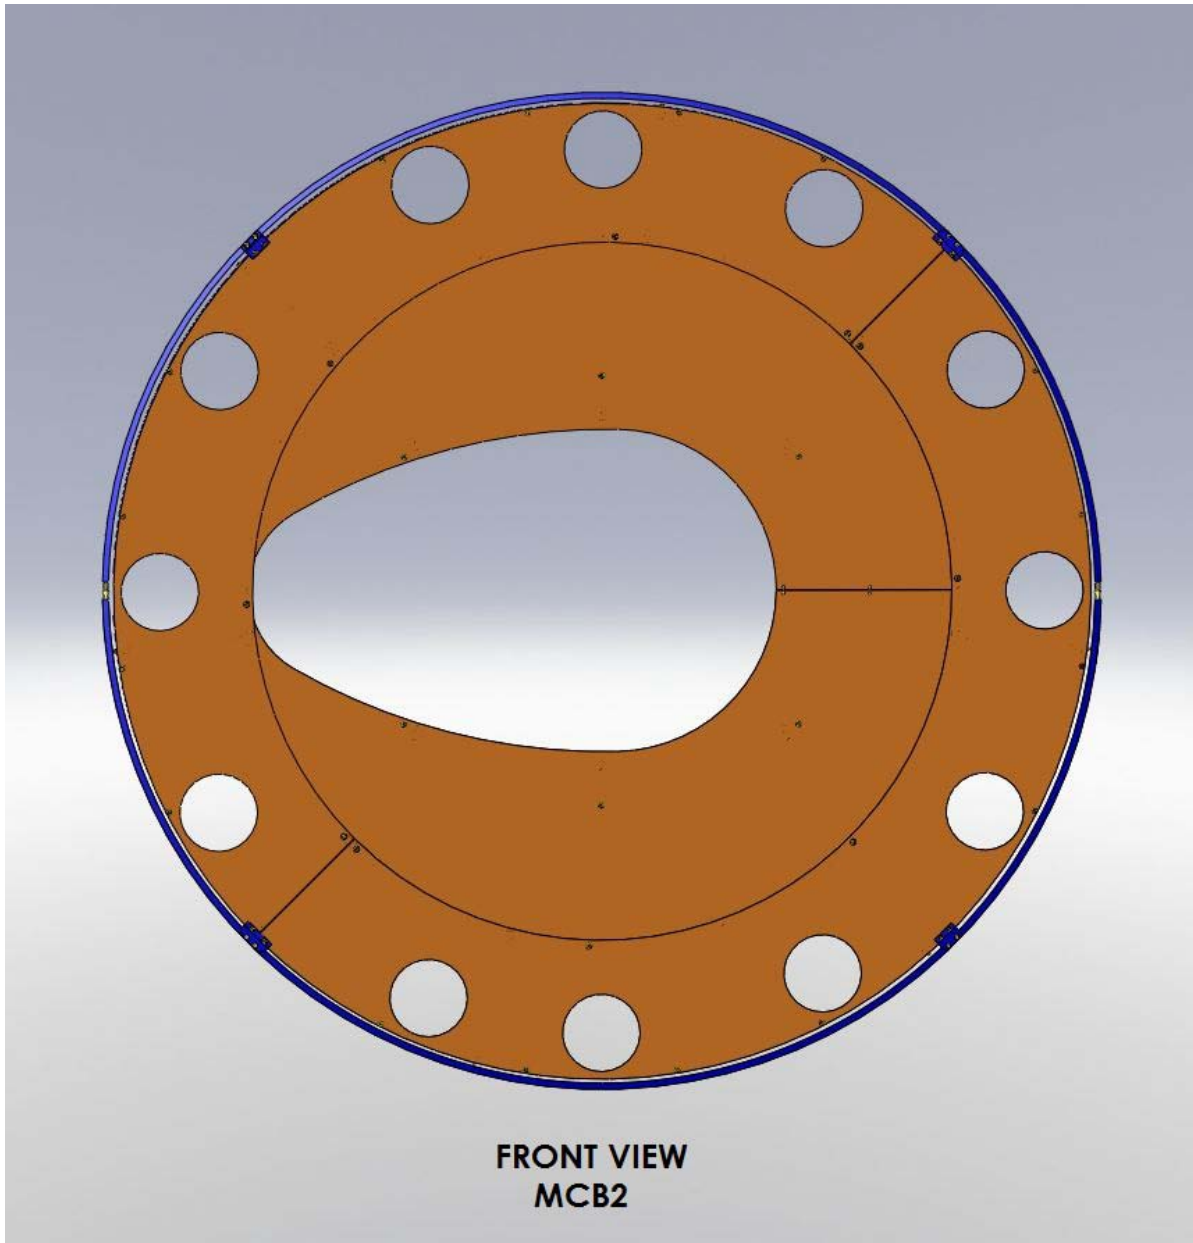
Front View of MCB2 Mode Cleaner Tube Baffle
